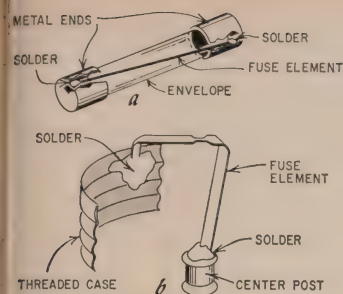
Internal assembly of fuses. a—cartridge type; b—plug type.
